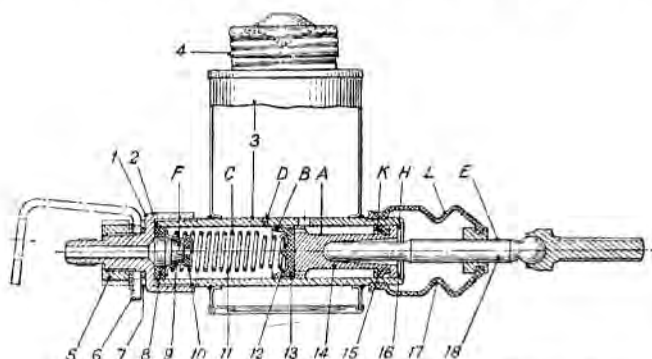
THE COMBINED MASTER CYLINDER AND SUPPLY TANK
